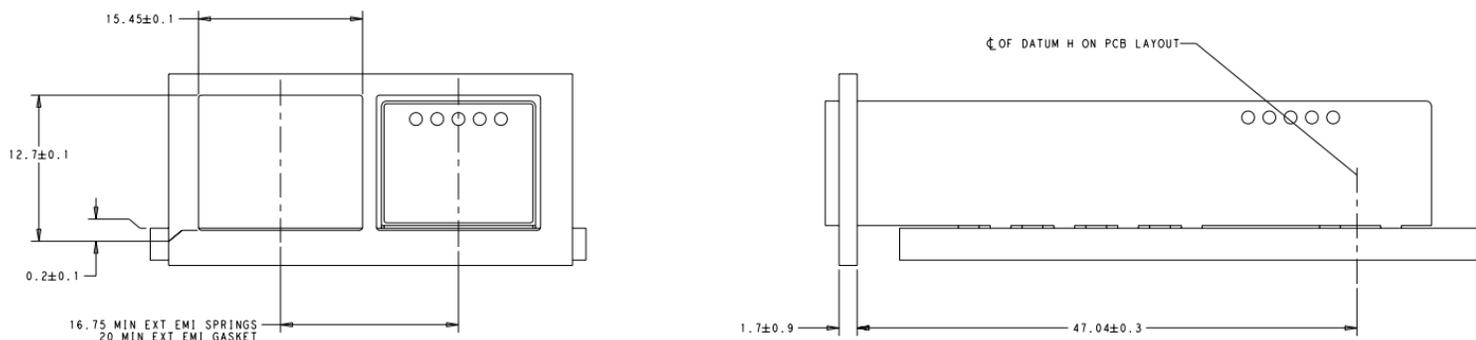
Recommended Bezel Design for Cages that extend into or thru Bezel
